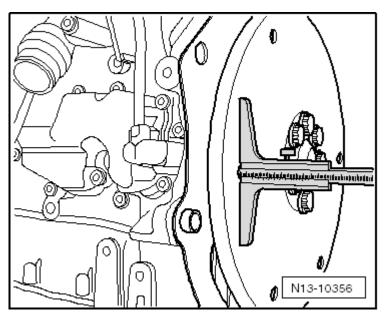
Identifying Dimension Between Drive Plate And Cylinder Block Courtesy of VOLKSWAGEN UNITED STATES, INC.
